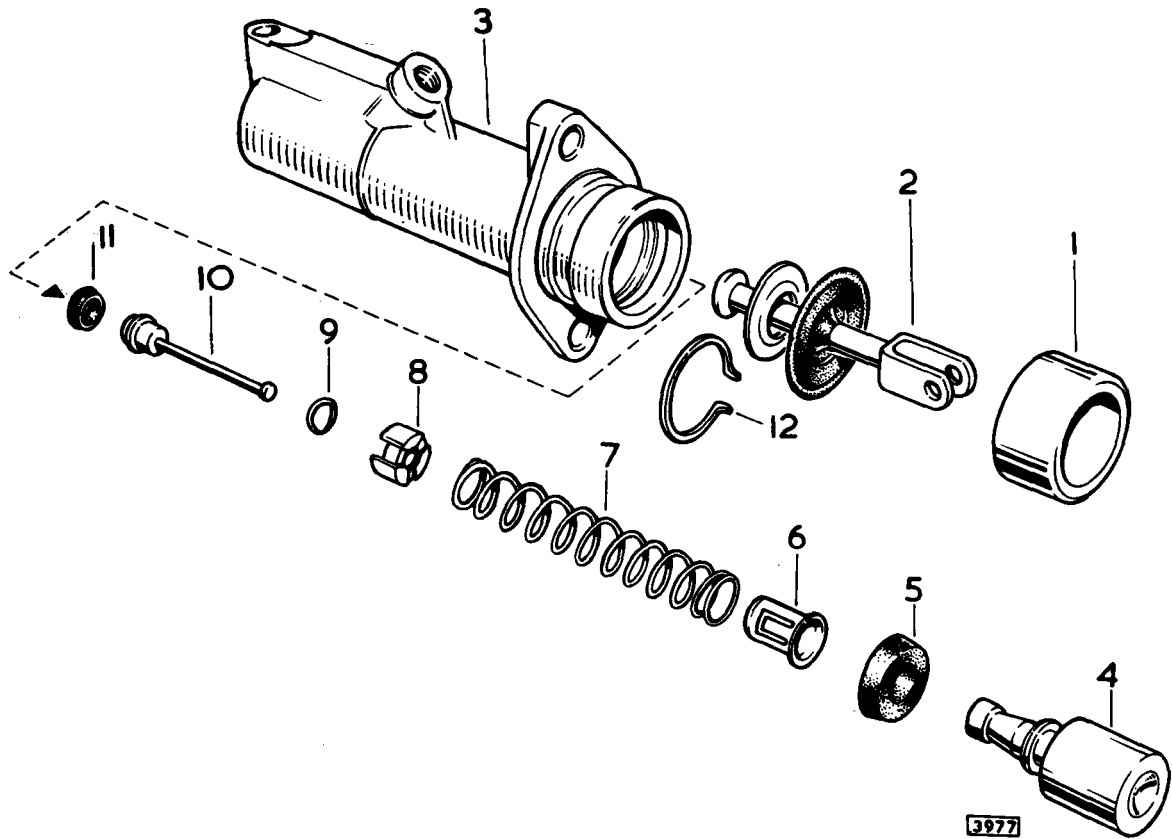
Exploded view of Girling Brake Master Cylinder.
